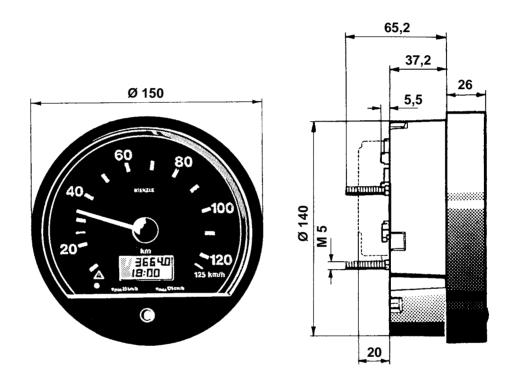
Electronic Speedometer 1323.01: Housing dimensions
